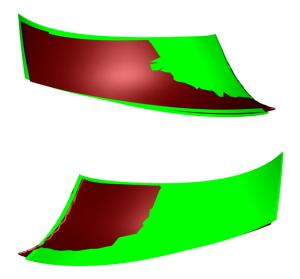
The comparison of model impeller blades with initial impeller and optimized impeller.
